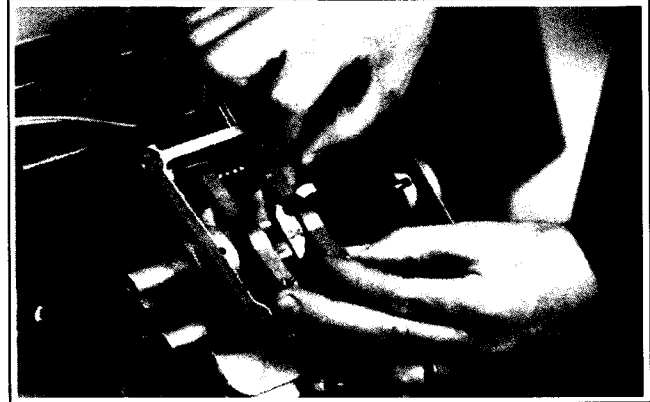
Removing Rocker Arm Assemblies (#2 Side Shown).
